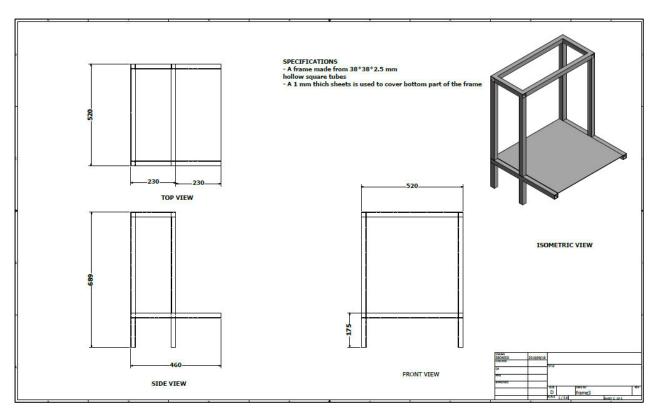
A detail drawing of a steel frame which was constructed with square tube
